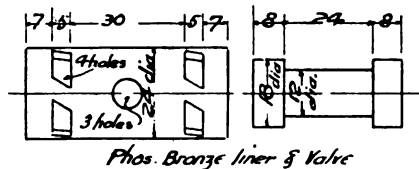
H.-P. CYLINDER LINER AND VALVE.
